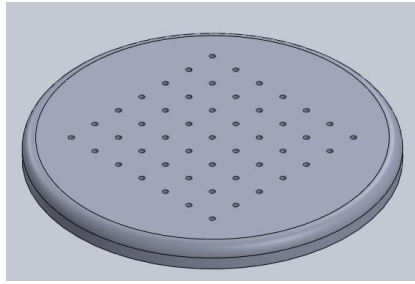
Testing piece for microneedle array assembly. This part was 3D printed using a Formlabs Form 2 printer. Two material resins were tested: Durable and Dental.
